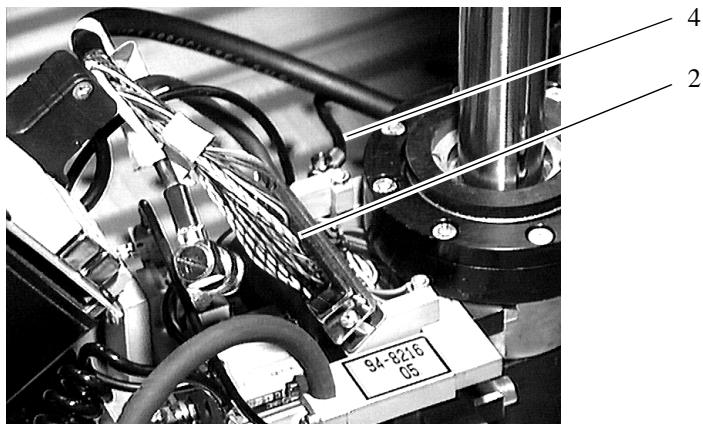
Connection Gripper Cable on the Gripper (Barcode Scanner)
